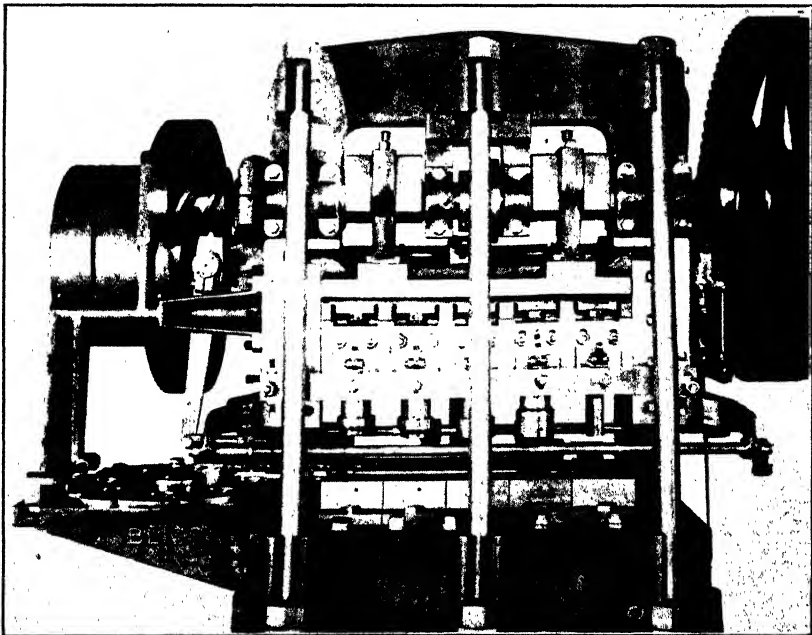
A series including drawing, redrawing, redrawing, perforating and trimming operations which is typical of many larger and smaller "multiple operation" groupings.
